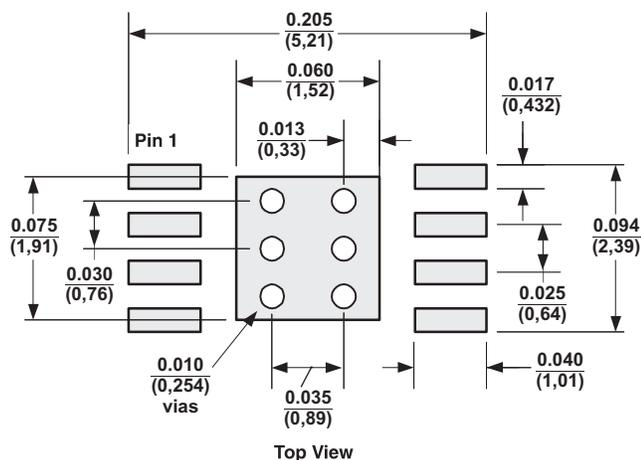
DGN PowerPAD PCB Etch and Via Pattern
